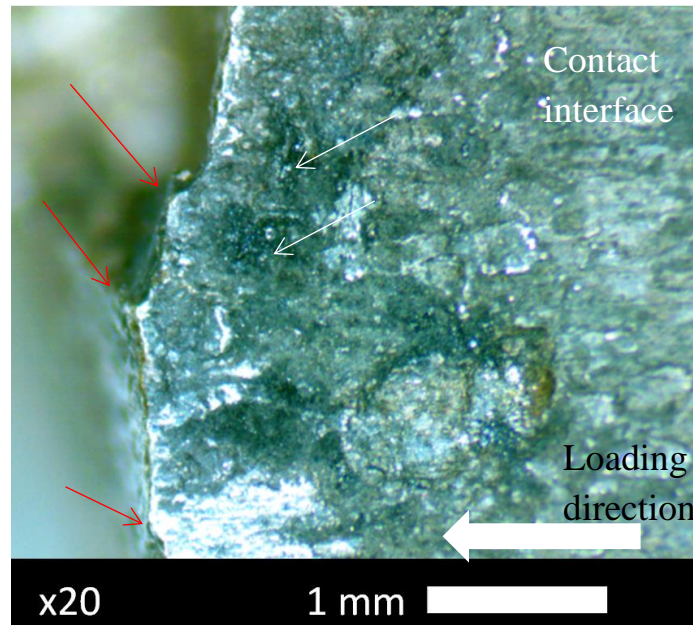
Camera image of the fracture surface of sample A10-A325-150.
